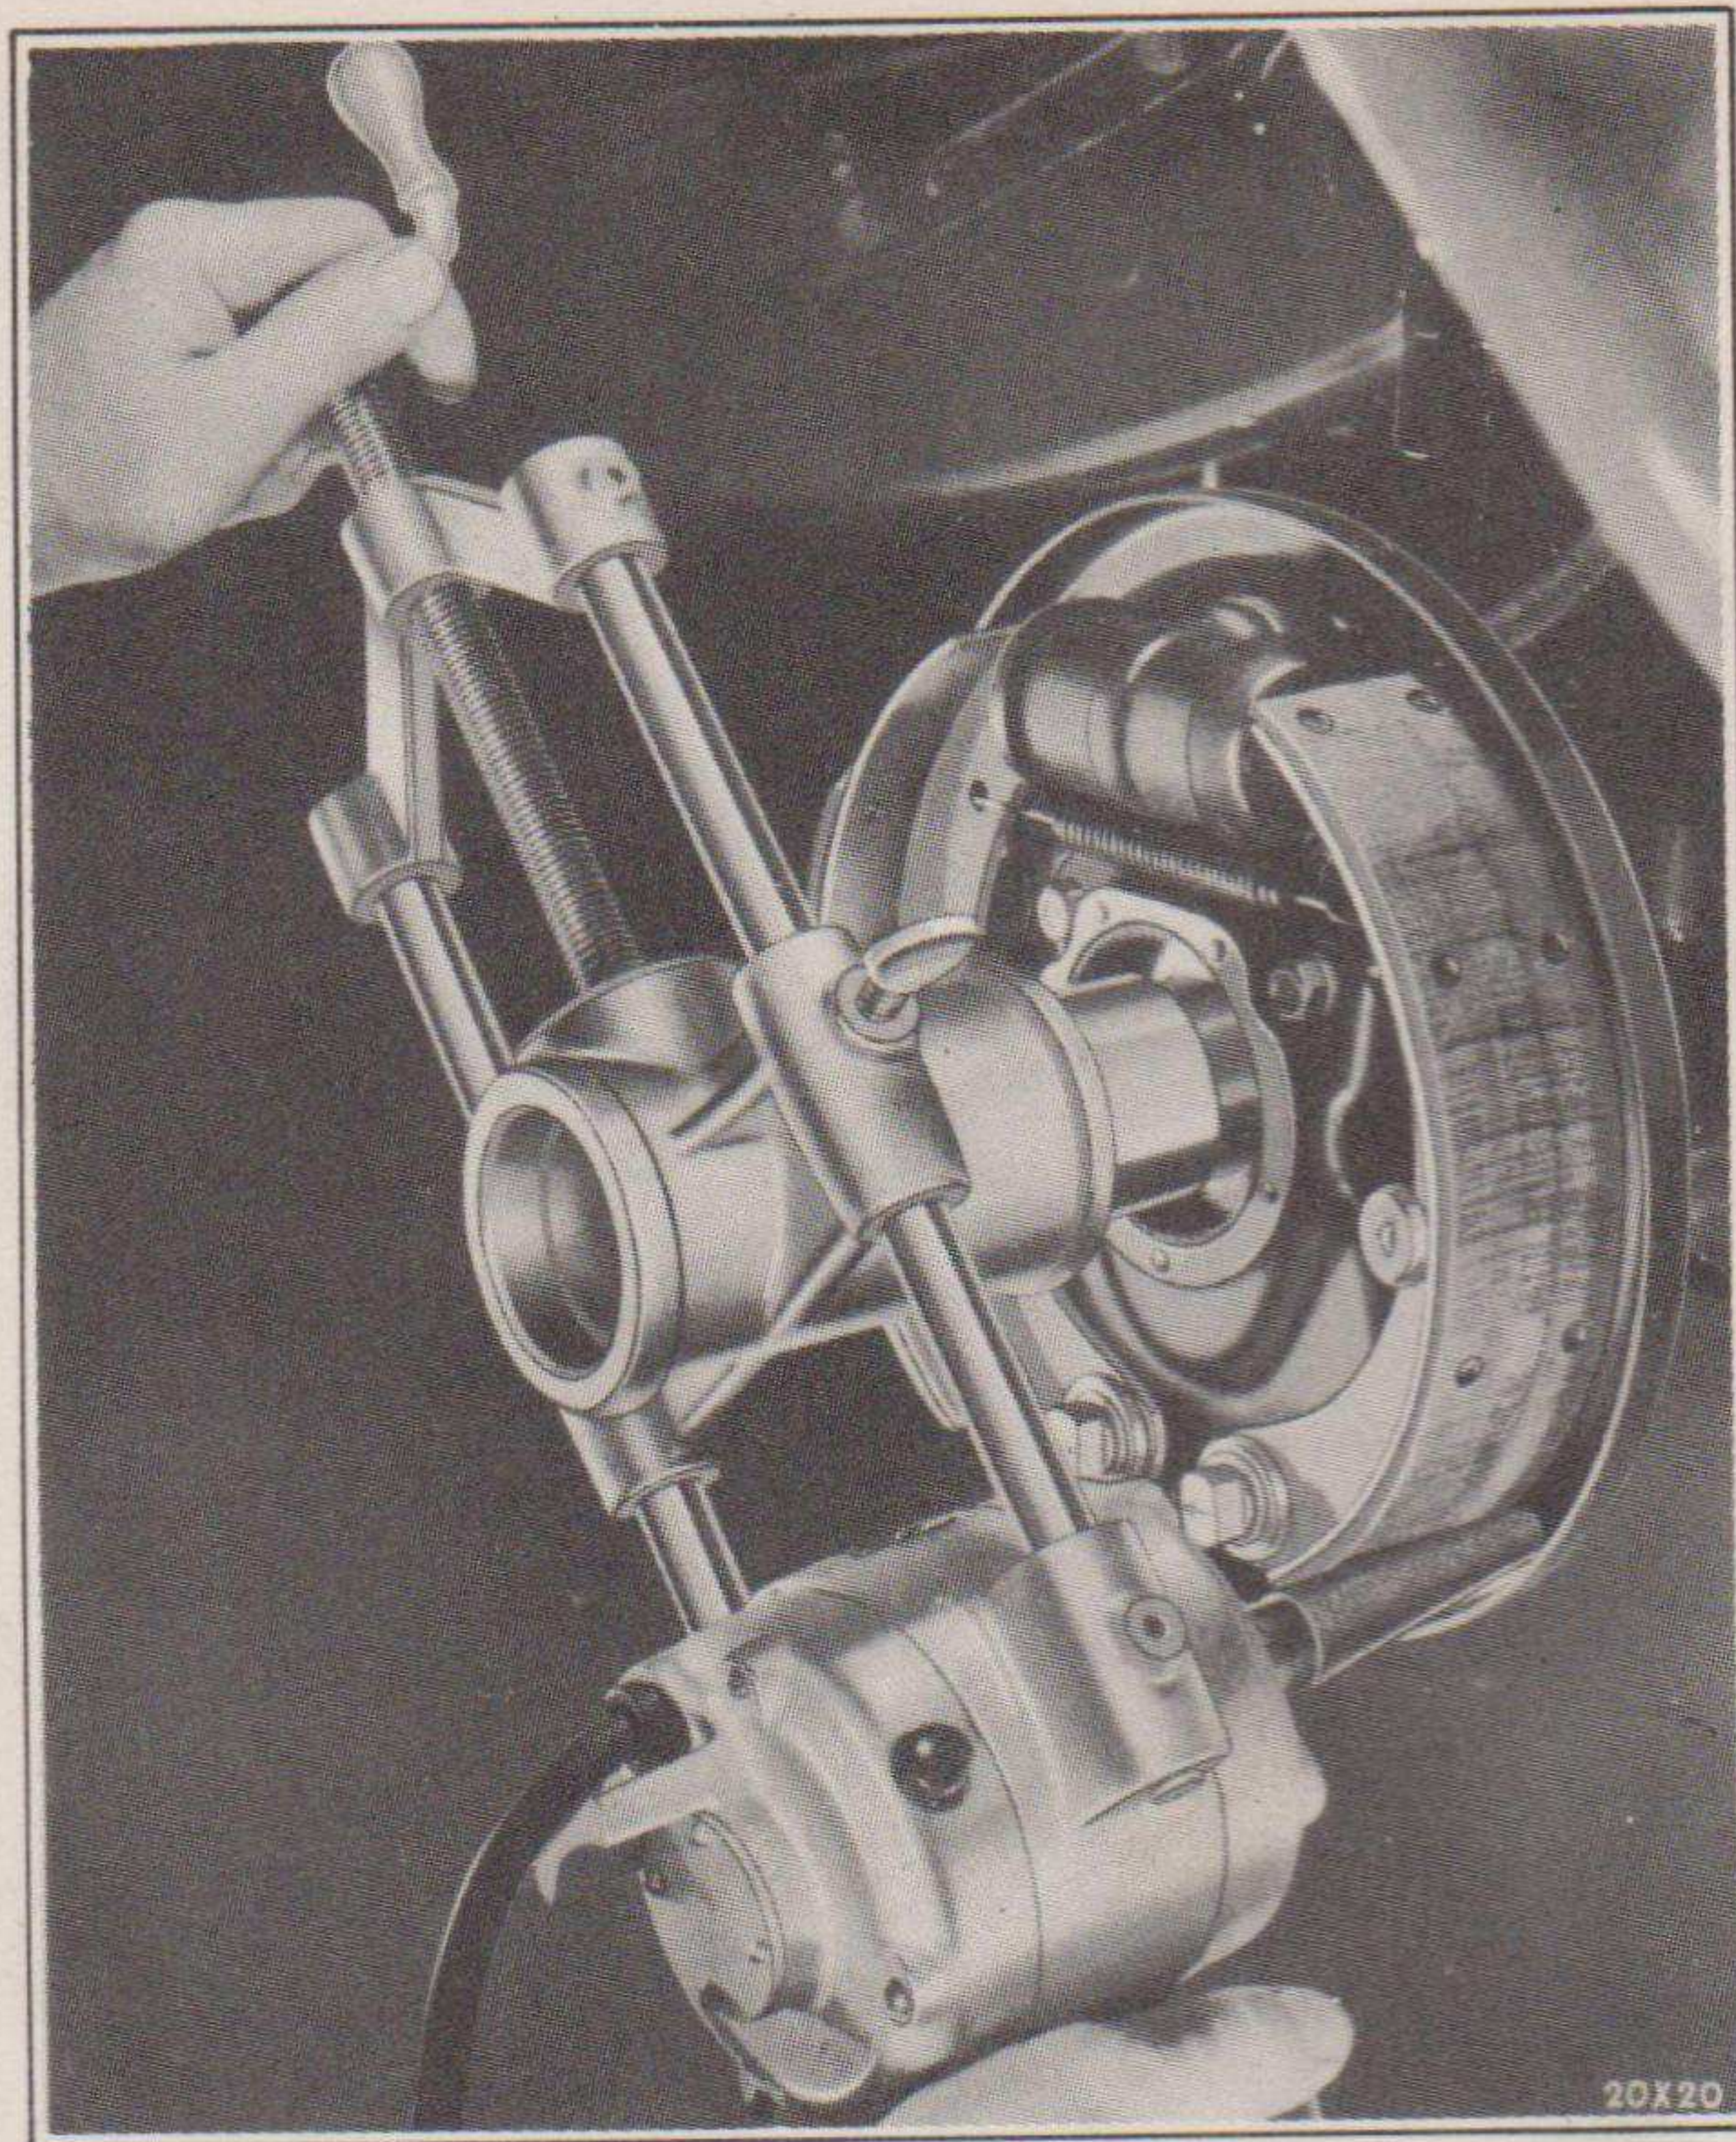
Grinding Brake Shoe Facing (Tool MT-44)
